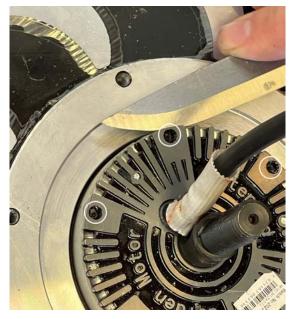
Example of how to facilitate removel of controller card housing with a knife.
